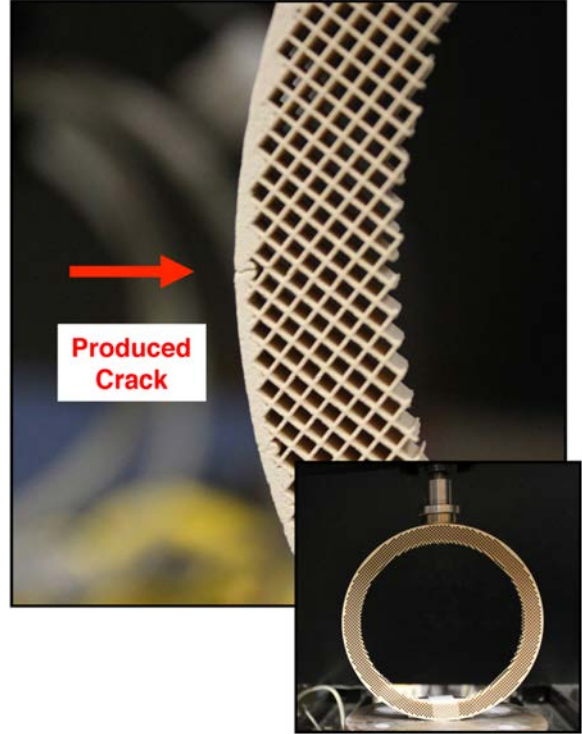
Example of a generated crack from o-ring flexure testing.
